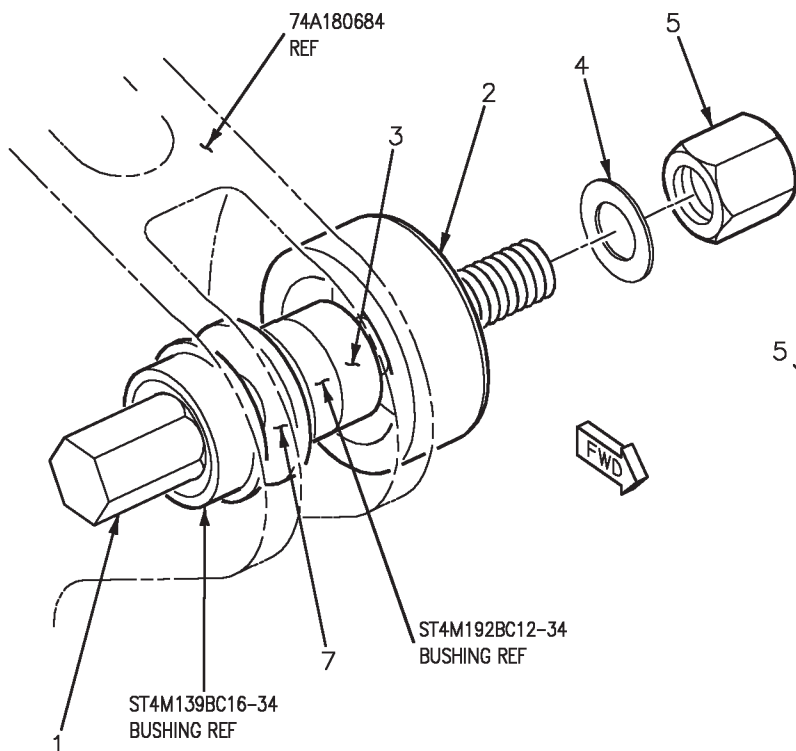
Bushing Removal, Installation, and Reaming (Sheet 11)
